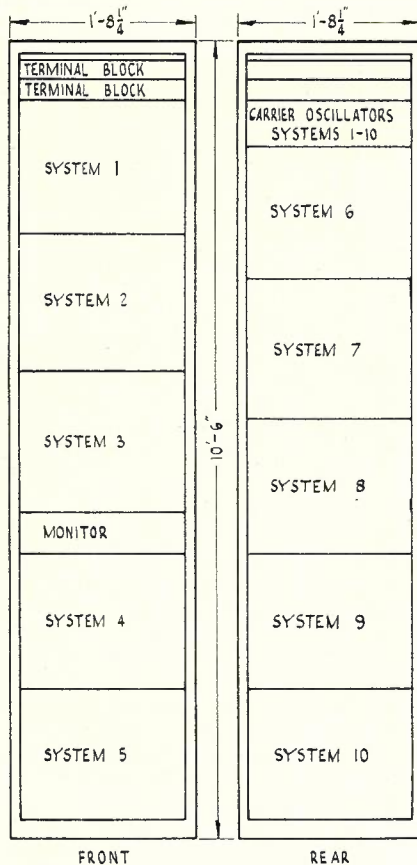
Terminal Layout of Type RY 432 Systems on 10 ft. 6 inch Rack.
